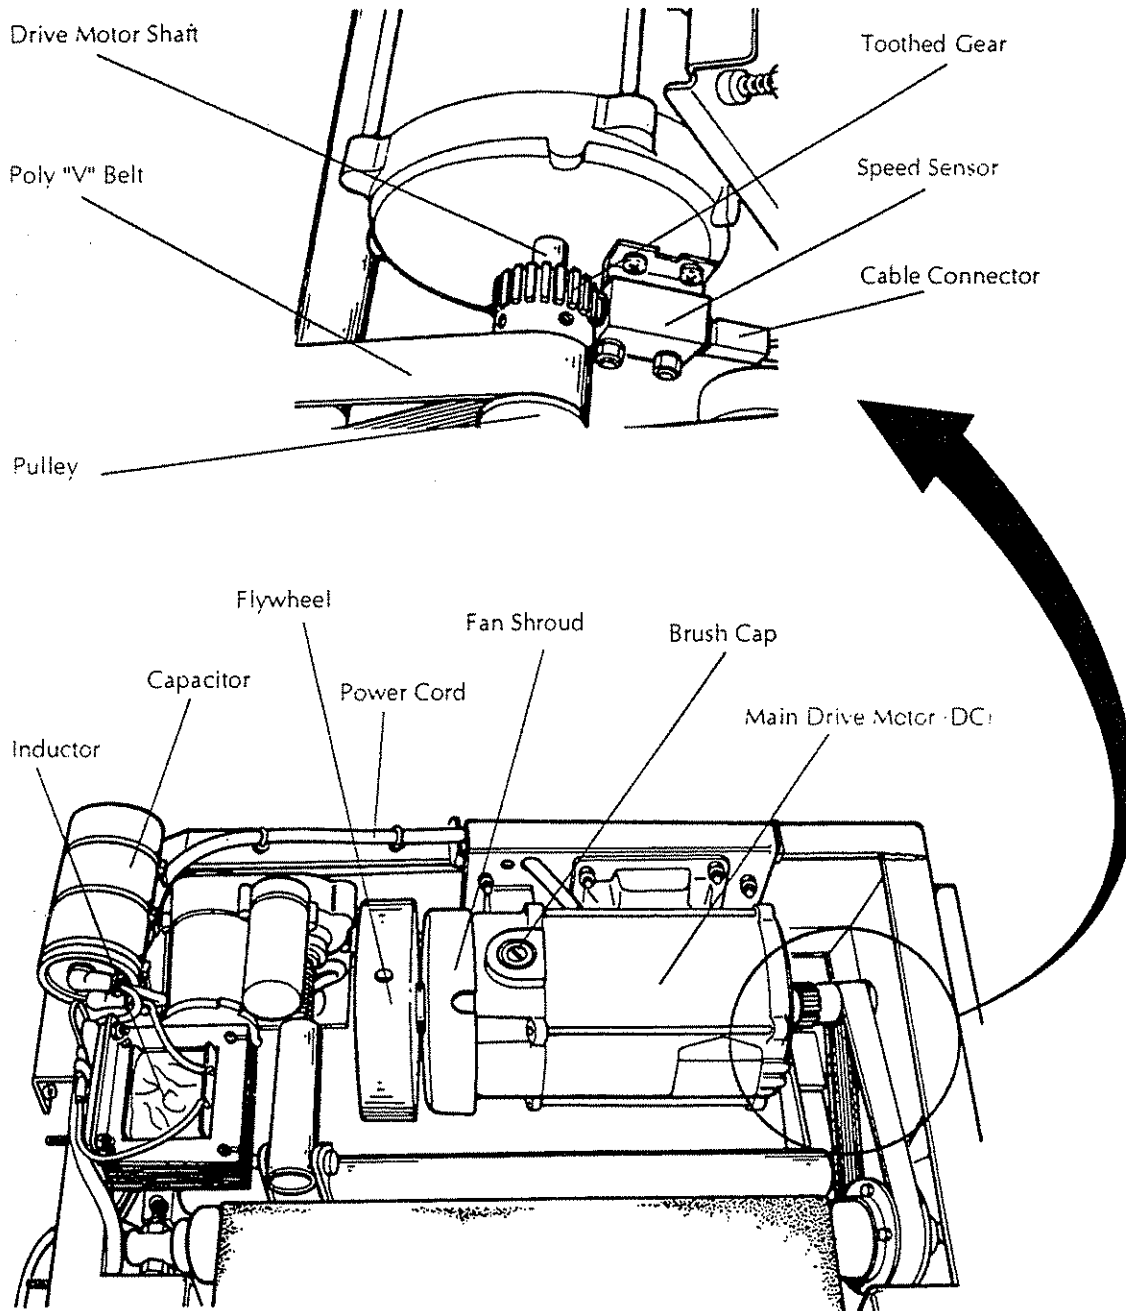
Main Drive Motor (DC) & Speed Sensor Assembly
